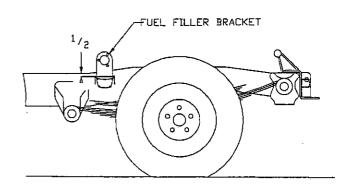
FUEL FILLER BRACKET INSTALLATION
